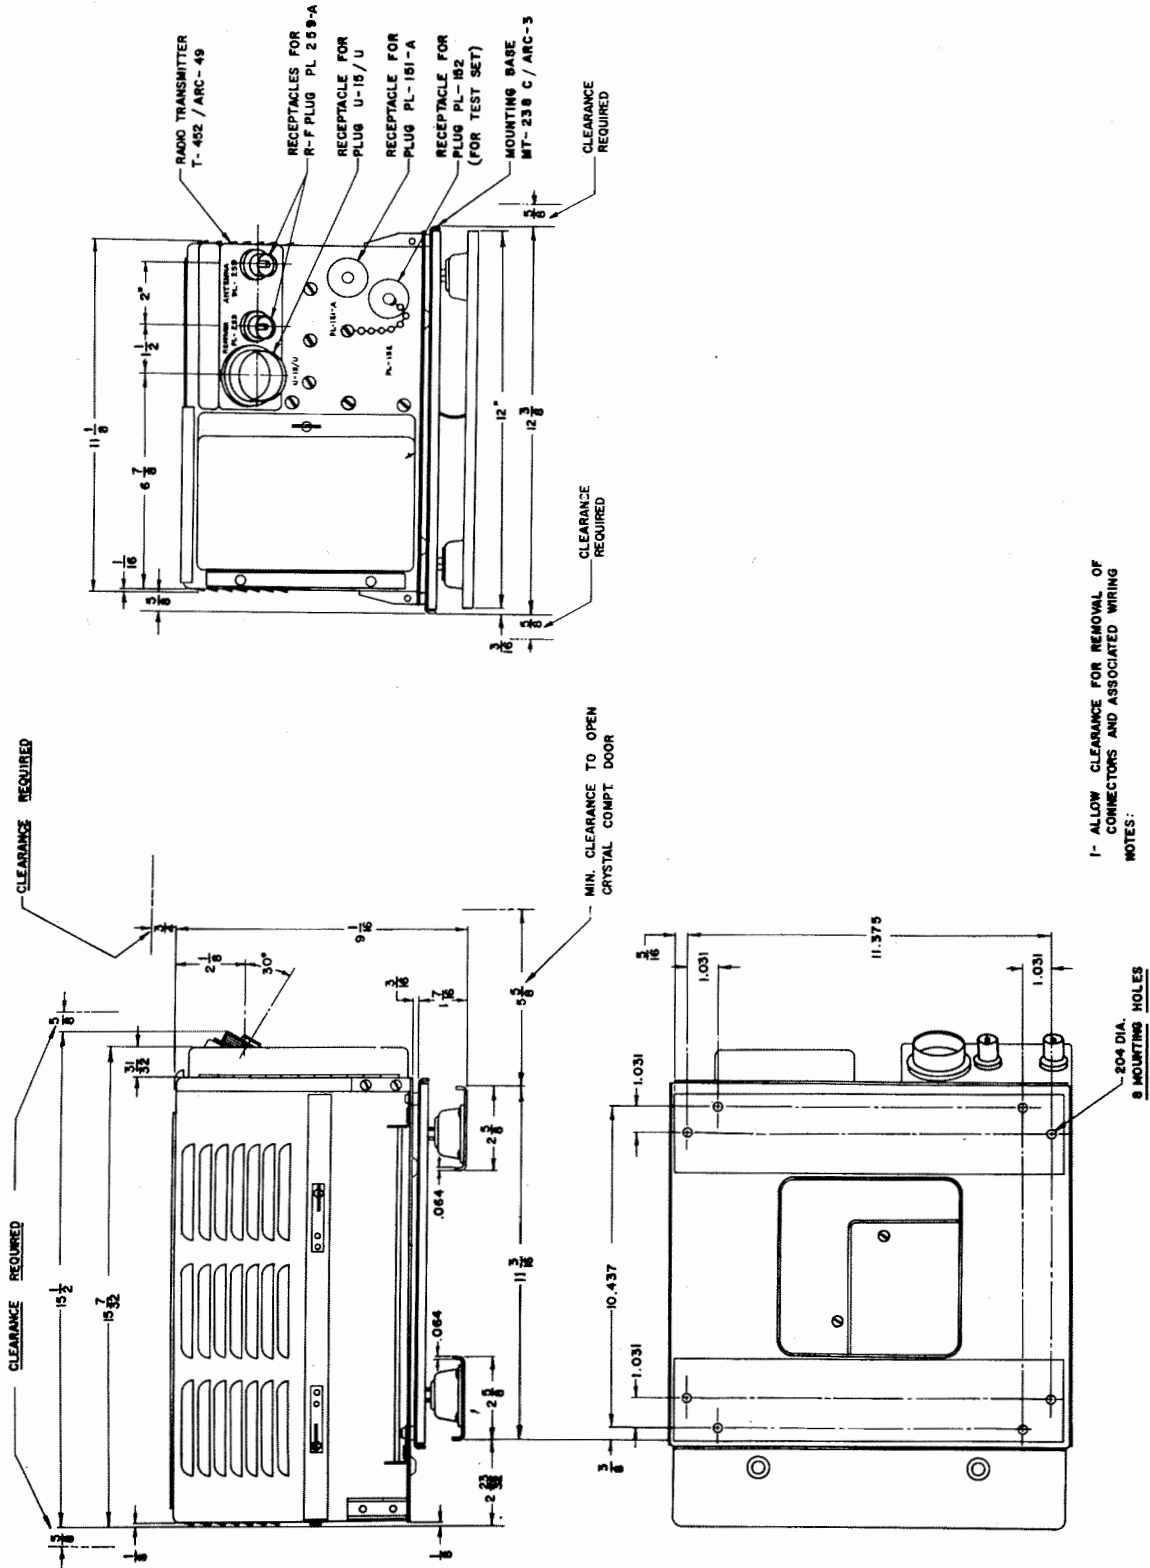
Radio Transmitter T-452/ARC-49—Outline Drawing and Mounting Dimensions
